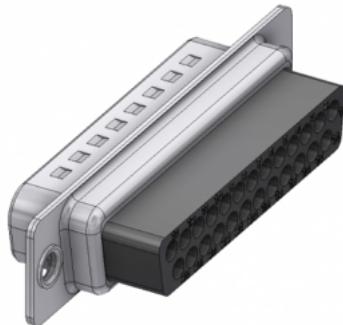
Crimp connector for the interlock and power cable, located on the outer side of the Opto Patch Panel [4].
